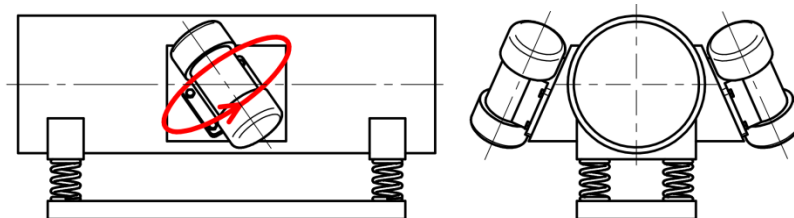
Linear vibratory conveyor with tilted unbalance motors
